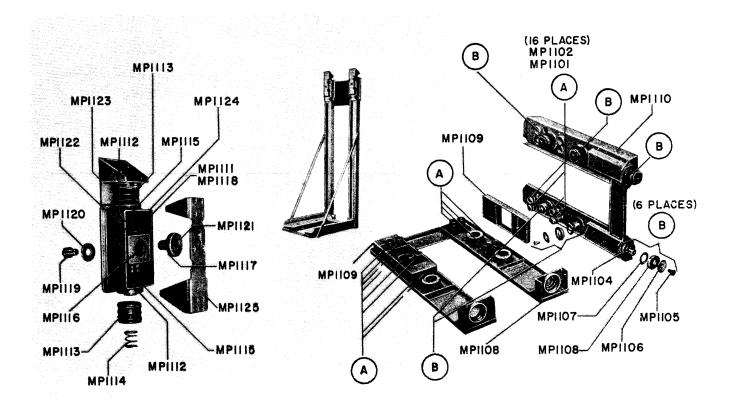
A. Mounting MT-2170/WRT, Location of Parts
